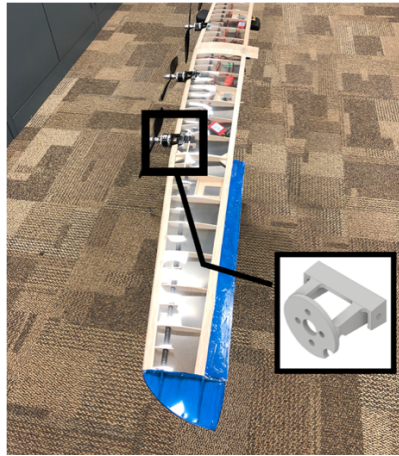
This figure represents depicts CAD model of motor mounts and basswood wing structure.
